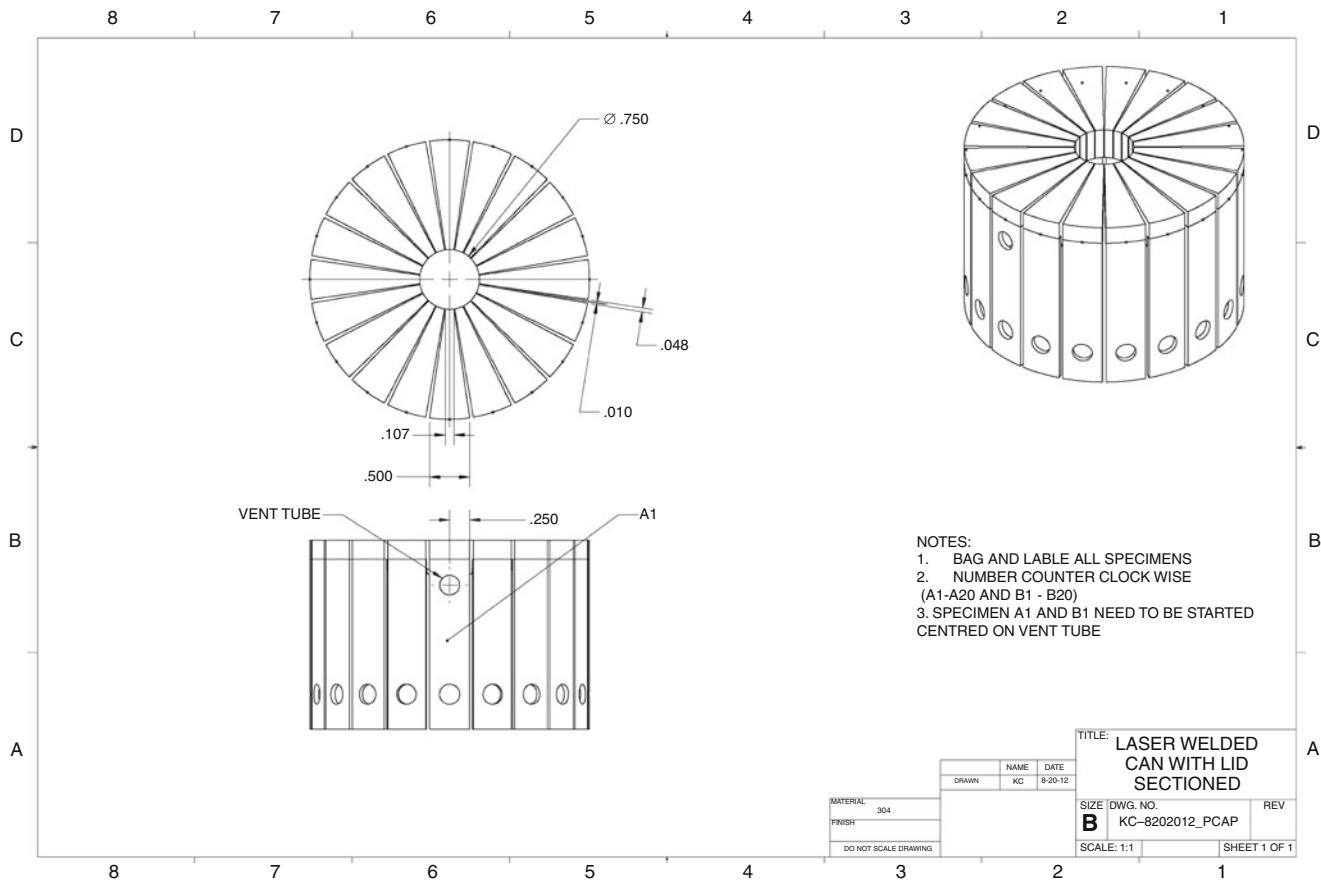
Laser welded can sectioned into 20 wedge shaped specimens
